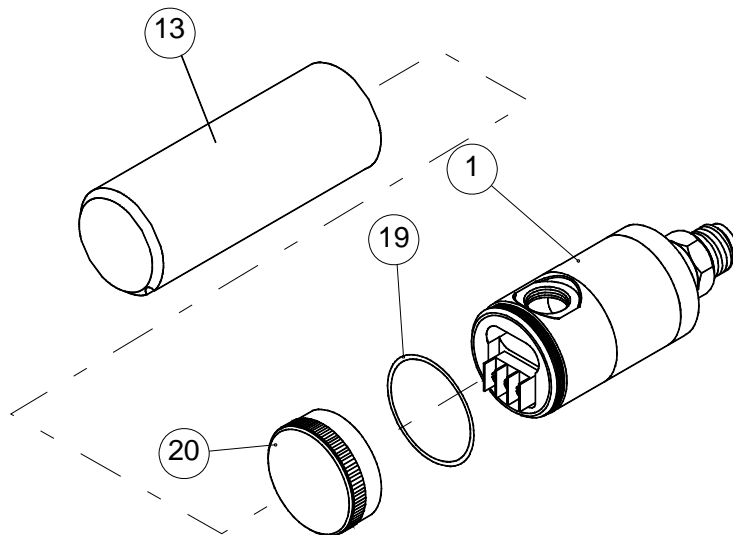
Parts list: housing with junction box / terminal strip, code M
